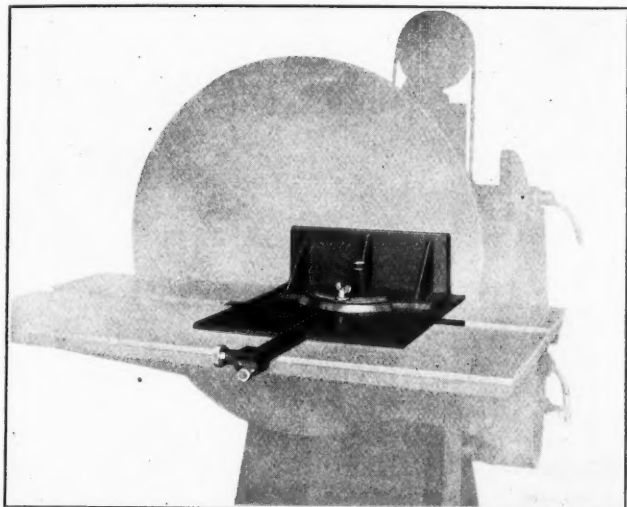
Universal Duplicating Gage for Grinding Sectors, etc.
